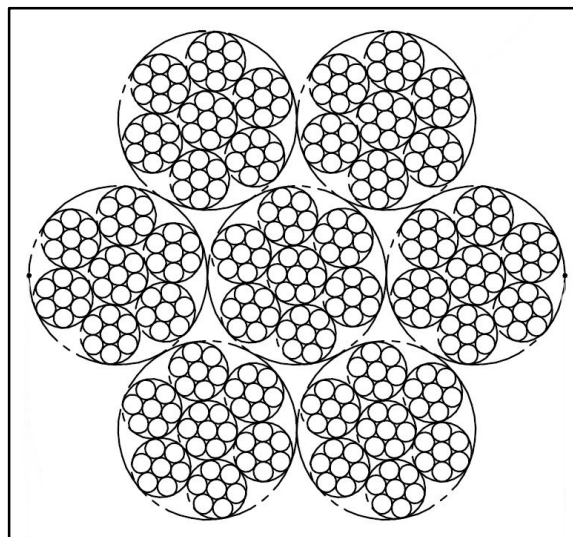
SECTIONAL VIEW OF 7x7x7 MULTI-FILAMENT CABLE
